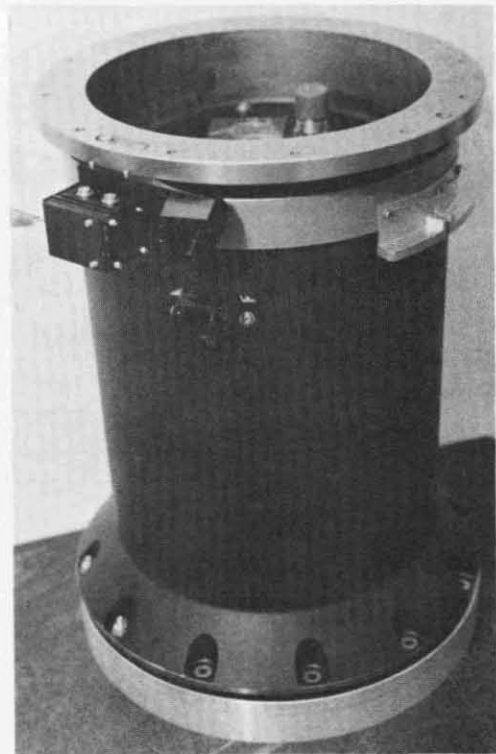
Advanced Satellite Beryllium Despin Bearing Assembly
